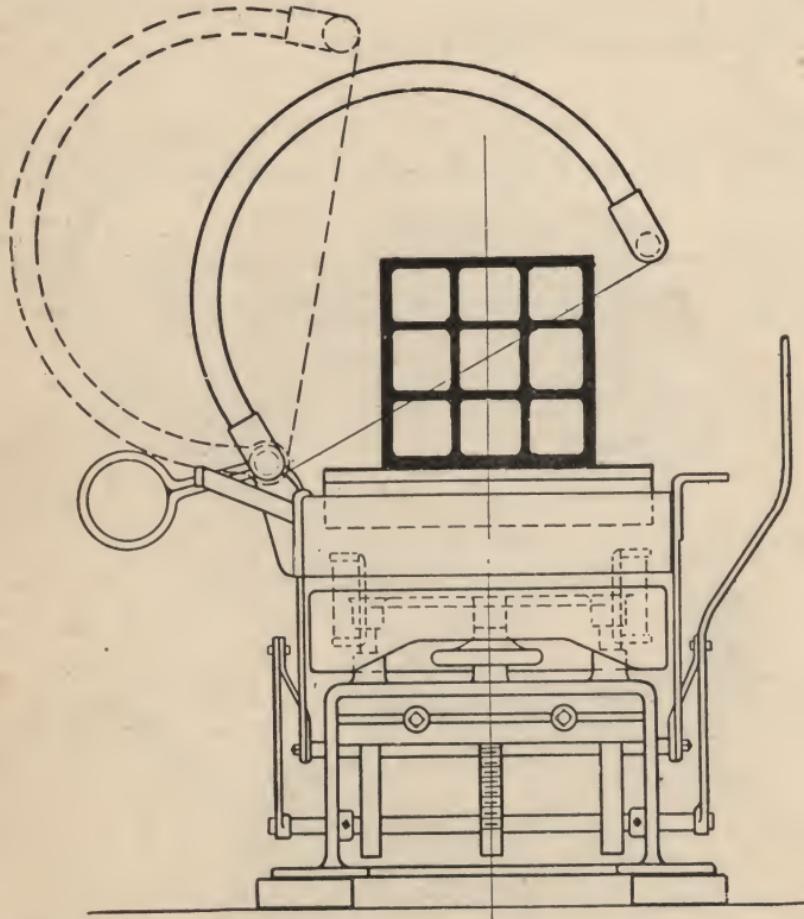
,810.—Freese hollow ware cutter; cross section showing wire movement. *It will cut* a clay column of any size up to 14×14 ins. The cutter carriage travels with the clay column while the cut is being made, the carriage being returned to its position near the machine die by means of the hand lever or foot treadle if preferred. *In operation*, the wires enter the corner, passing through the clay column with a shearing movement and leaving smoother edges and better walls than with the type of cutter which carries the wires from side to side or from the top straight downward, striking the walls of the column broadside.
